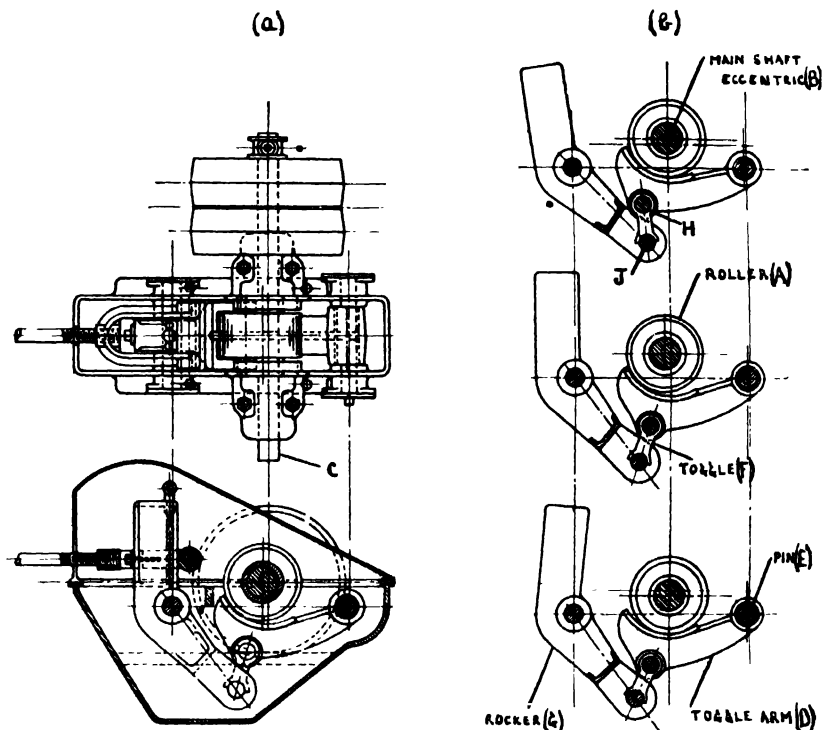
Head Mechanism : Deister Plat-O Table.
